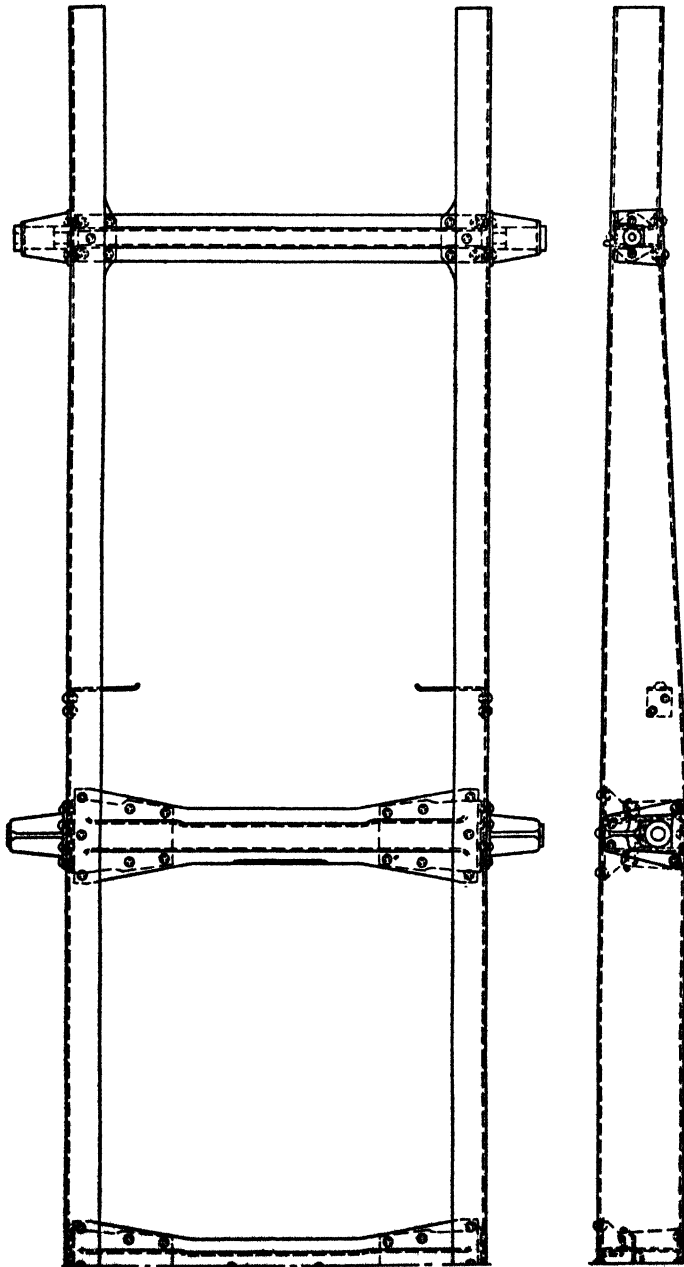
B.—MOTOR-TRUCK FRAME, REAR HALF.
